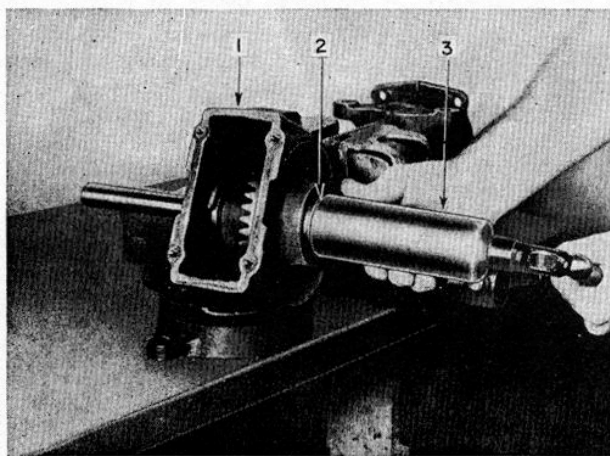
INSTALLING TILLER DRIVE SHAFT OIL SEALS
